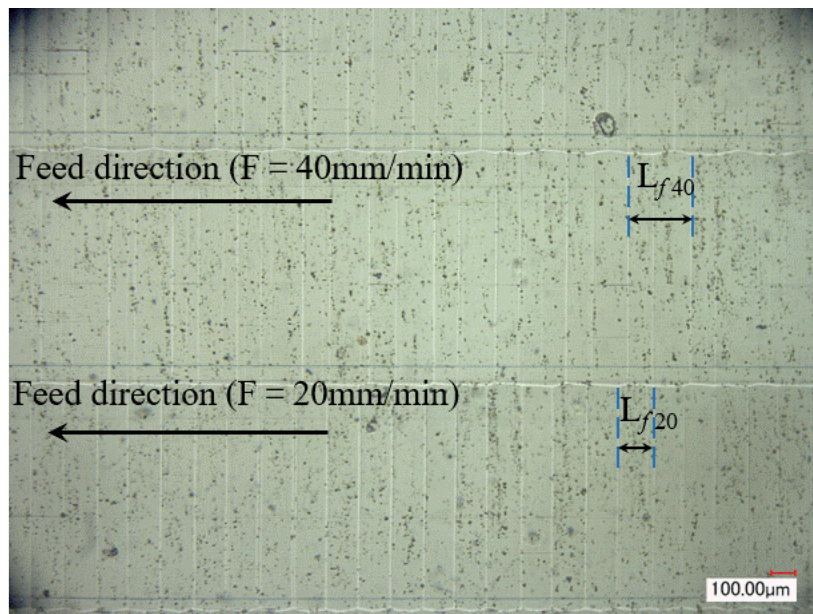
Picture of the machined surface (feed rate : 20 mm/min, 40 mm/min).
